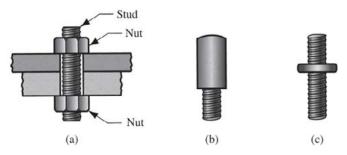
(a) Stud and nuts used for assembly. Other stud types: (b) threads on one end only and (c) double-end stud (Groover, 2021).
